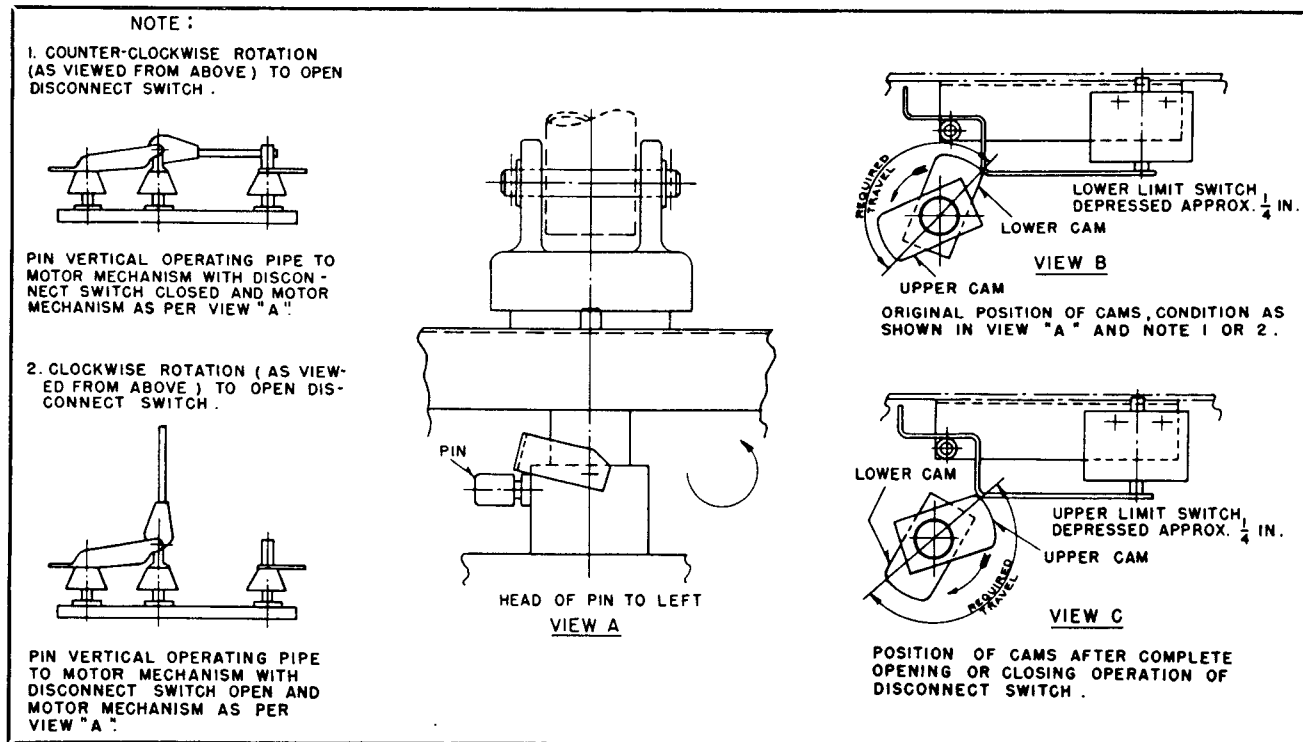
Alignment of Disconnecting Switch Position for Motor Mechanism Travel
